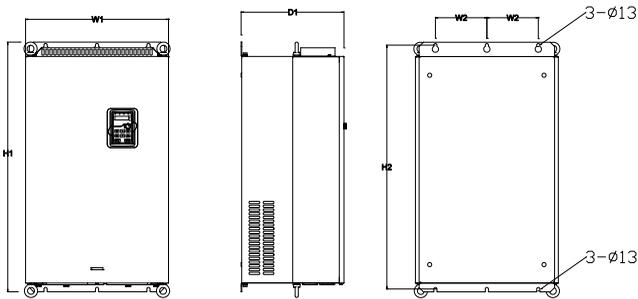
Wall-mounting diagram of servo drives of 380 V, 132 to 200 kW
